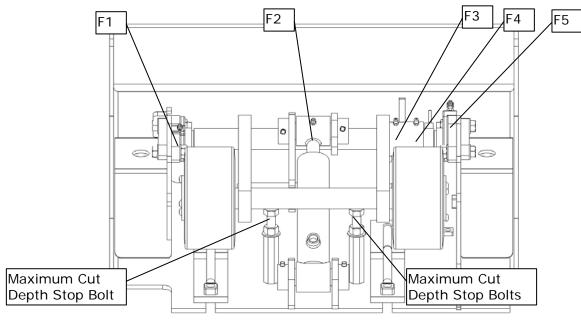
Grease Fittings and Maximum Cut Depth Stops
